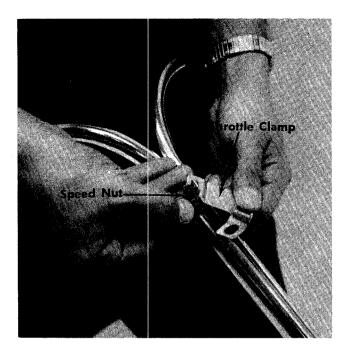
THROTTLE CLAMP ASSEMBLY Step 3.
